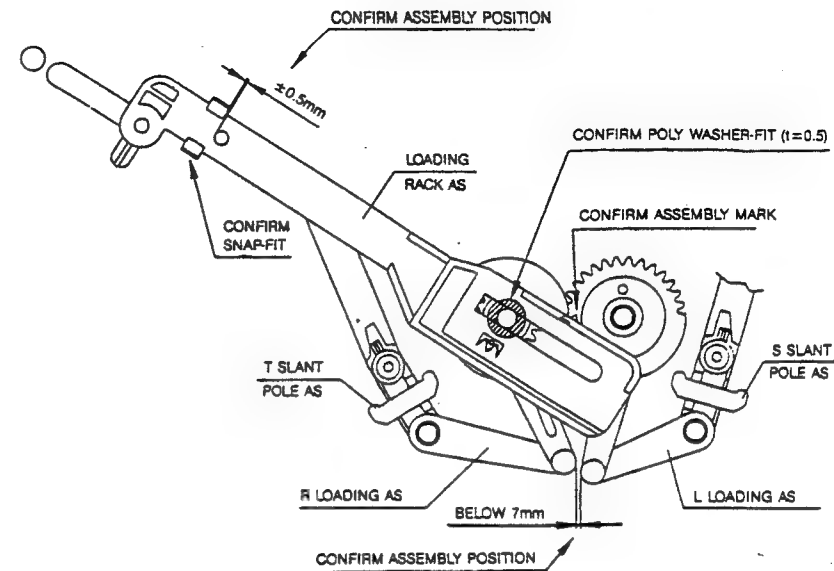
Reference of assembly for the Loading Rack and R/L Loading AS
